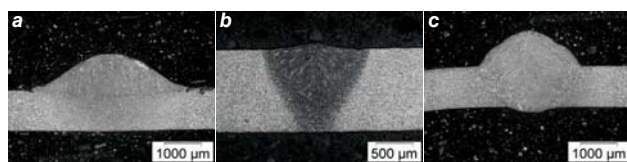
Weld cross-section of (a) MIG, (b) laser and (c) laser hybrid welded DP 590 steel specimens
